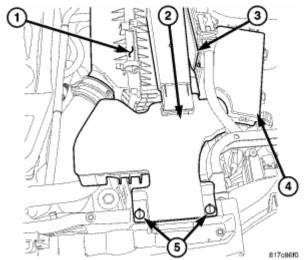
AIR CLEANER INLET Courtesy of CHRYSLER LLC
